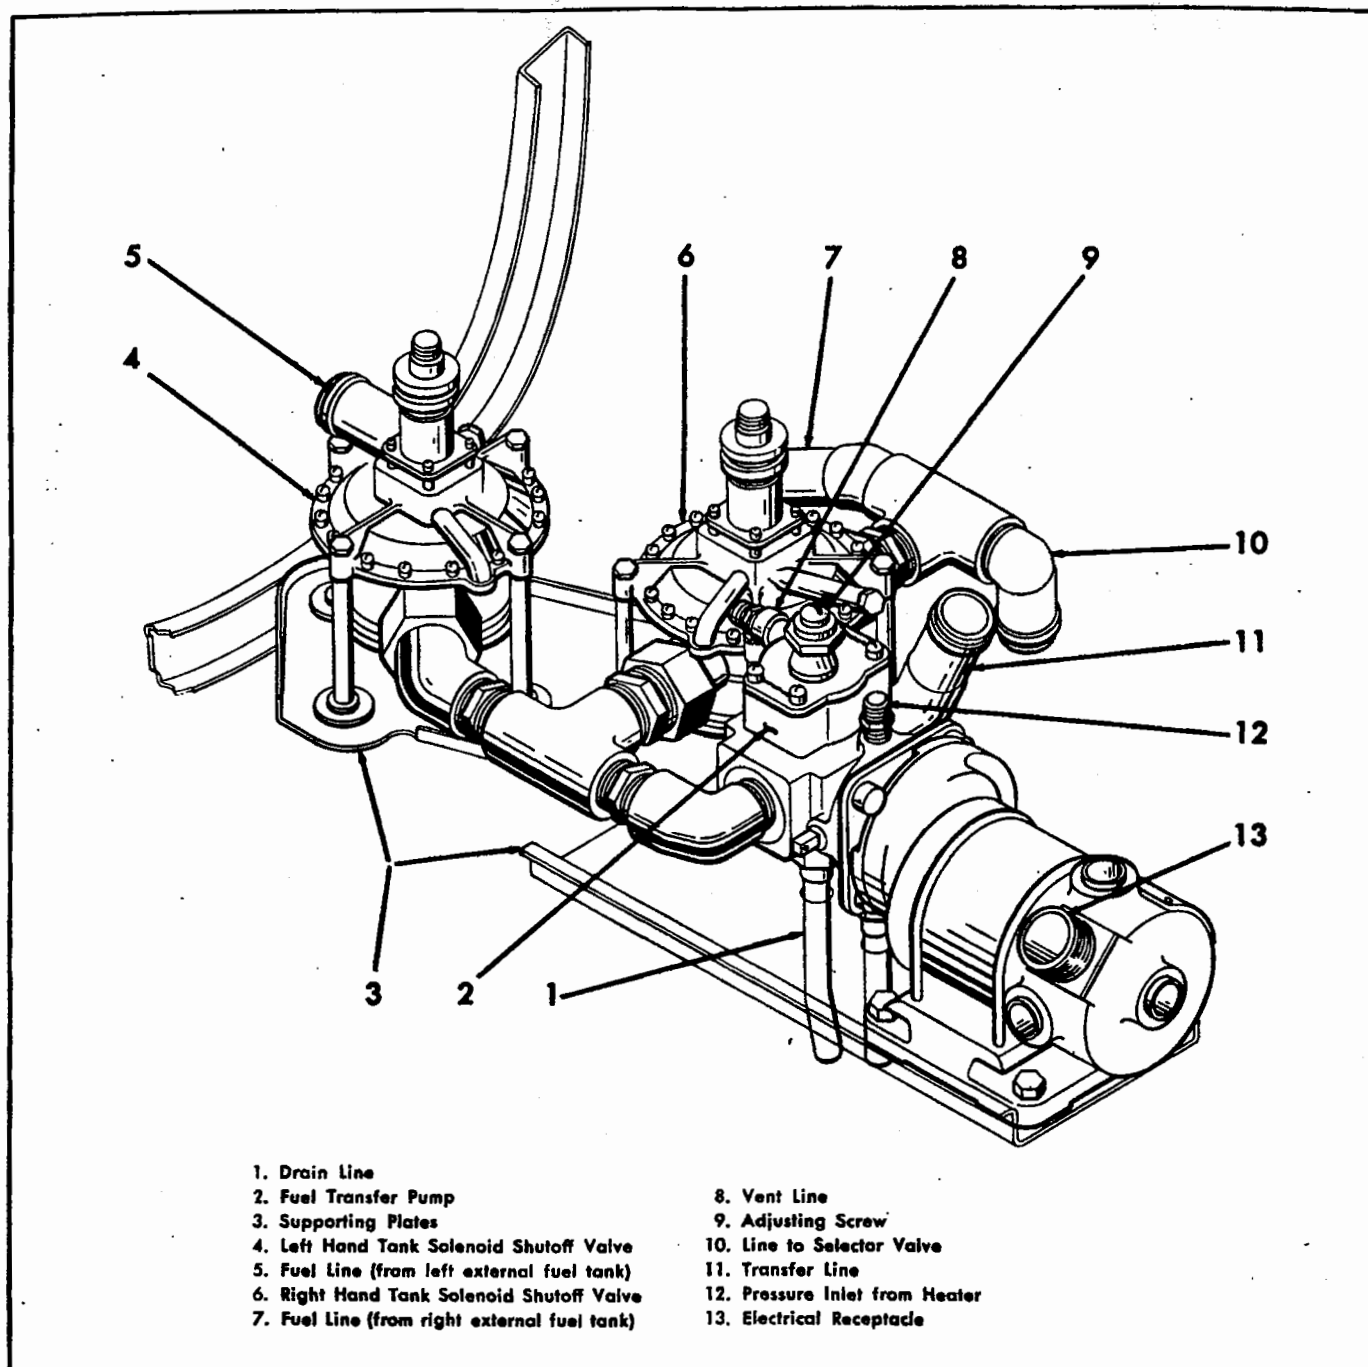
Fuel Transfer Pump and Solenoid Valves Installation.
